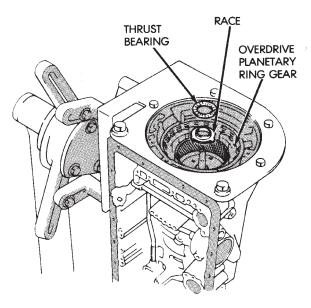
Removing Bearing, Race And Planetary Ring Gear
